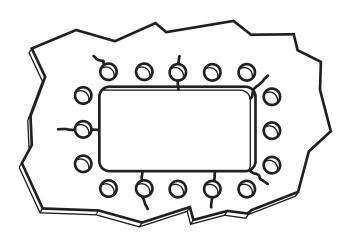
b RIVET AND STAYBOLT HOLE CRACKS
